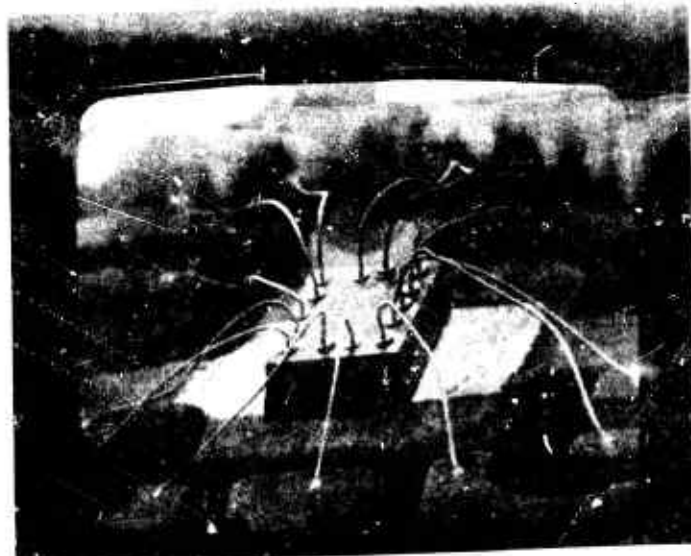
SEM Photograph of Vendor 3 Device Wire and Lead Frame Assembly after Chemical Removal of Encapsulant.
